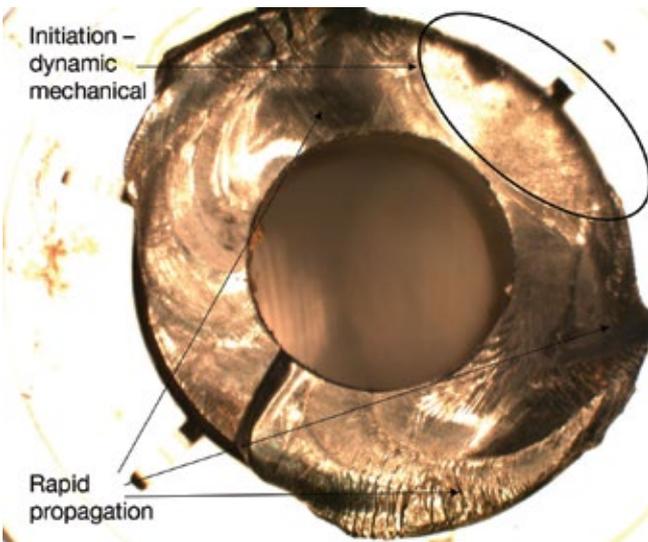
Typical fracture pattern of dynamic mechanical or fatigue failure in sulfone polymers
